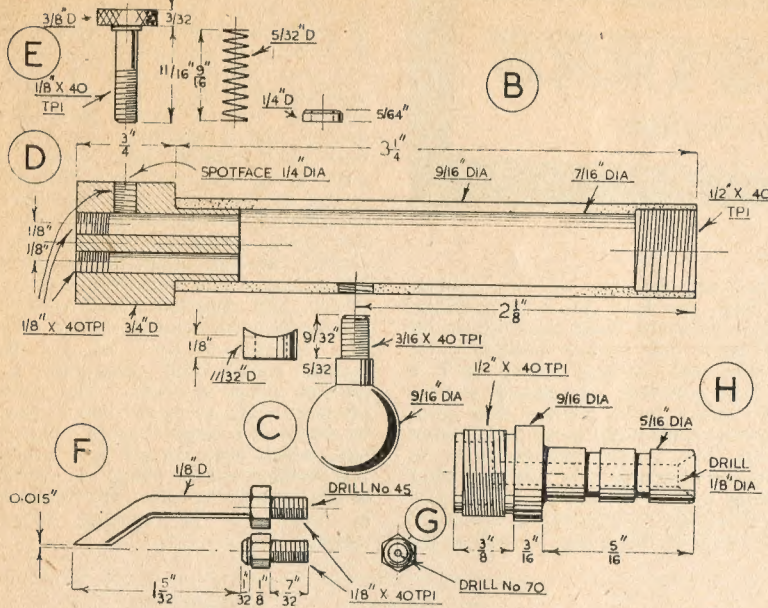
B—the torch body; C—the ball mounting; D—the head fitting; E—the regulating screw and spring; F—the gas nozzle; G—the gas nipple; H—the gas input connector
